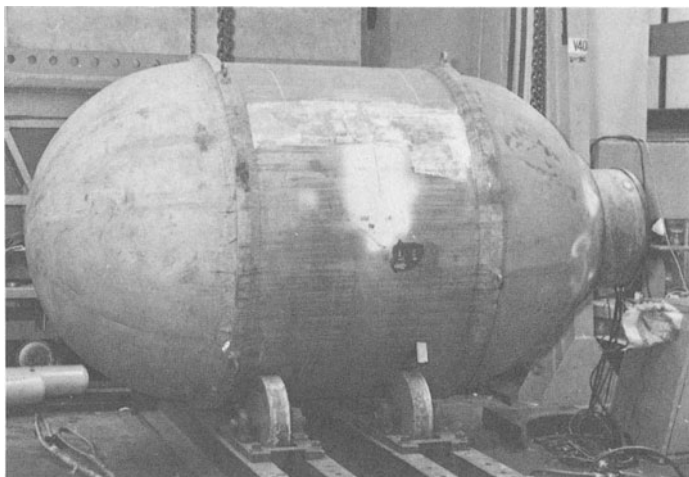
Through Shell Fatigue Crack in Vessel S8/1.
